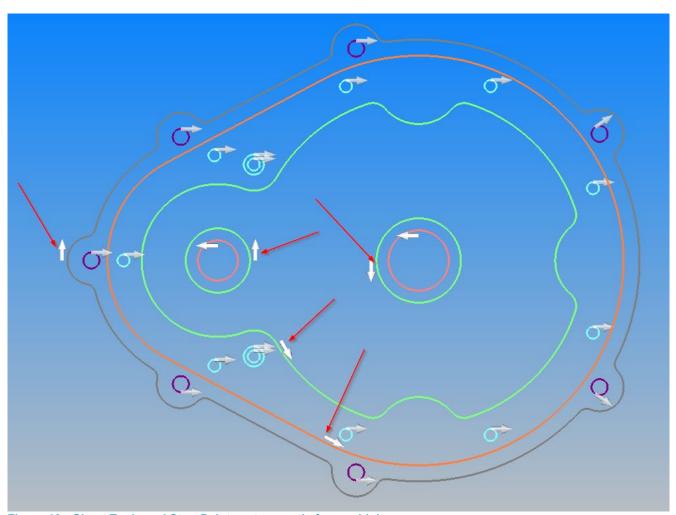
Ghost Tools and Start Points set correctly for machining.
